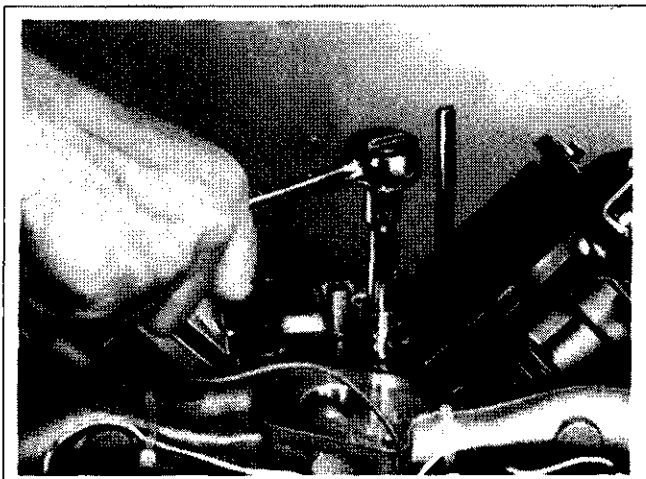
Removing Fasteners Holding Baffle and Breather Cover.
